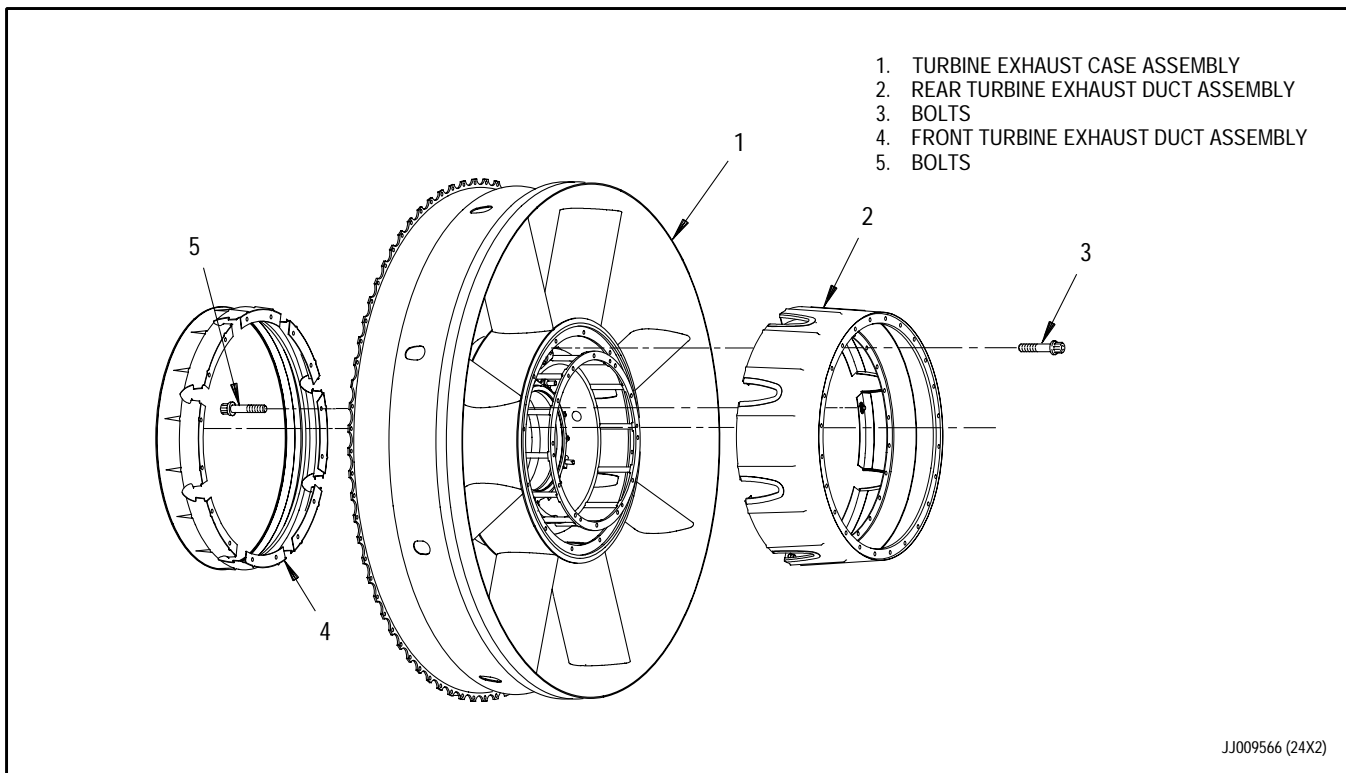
Front and Rear Turbine Exhaust Duct Assemblies - Installation
